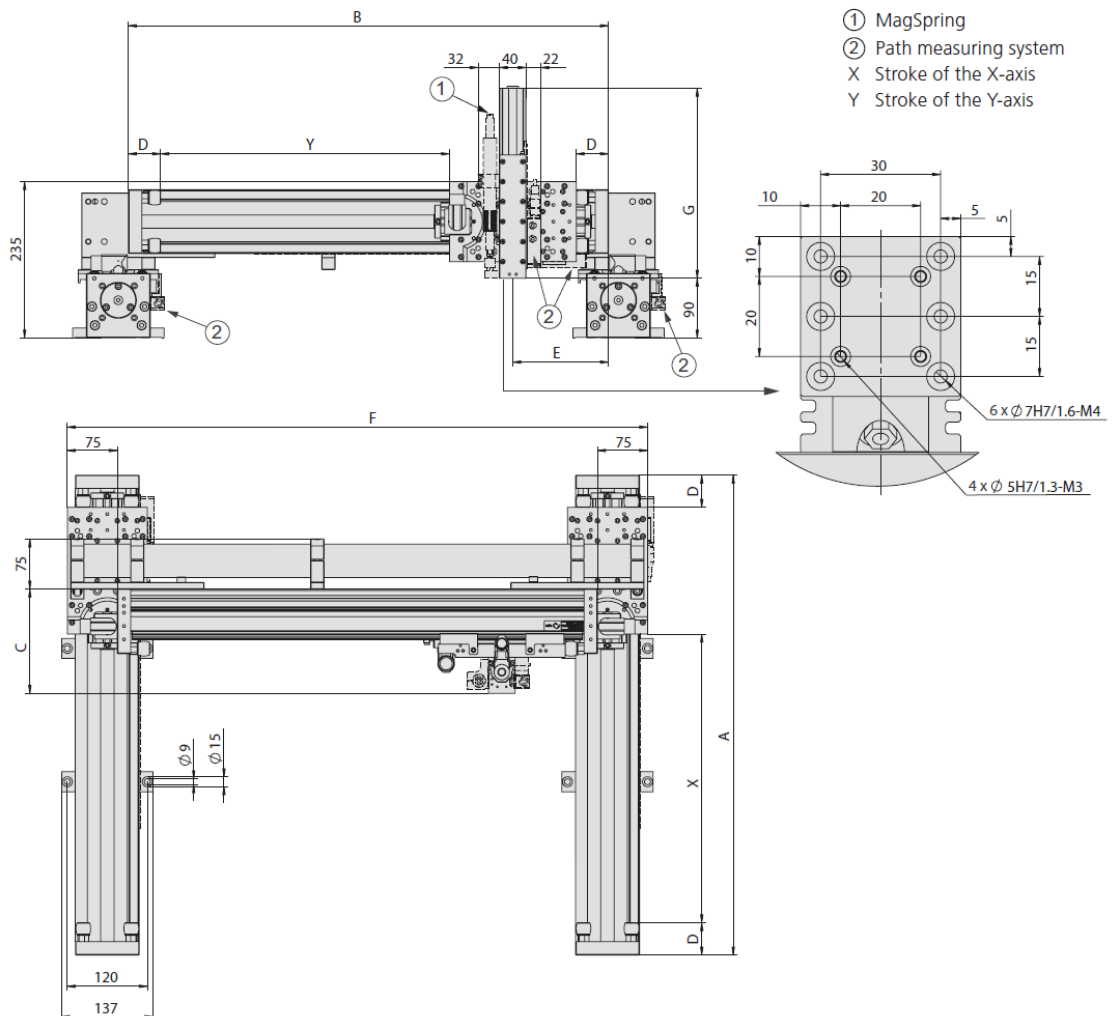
Dimensioned drawing EPS midi gantry XXYZ
